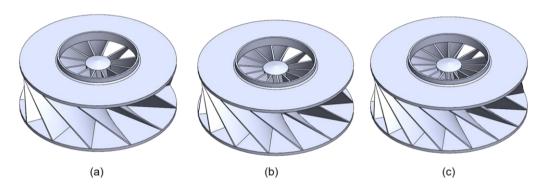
Modeling of impeller, (a) 12 blades, (b) 14 blades, and (c) 16 blades
